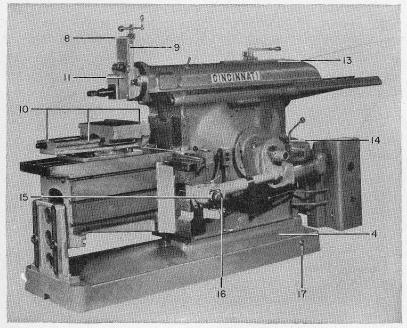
Lubricating points. (The Cincinnati Shaper Company)
